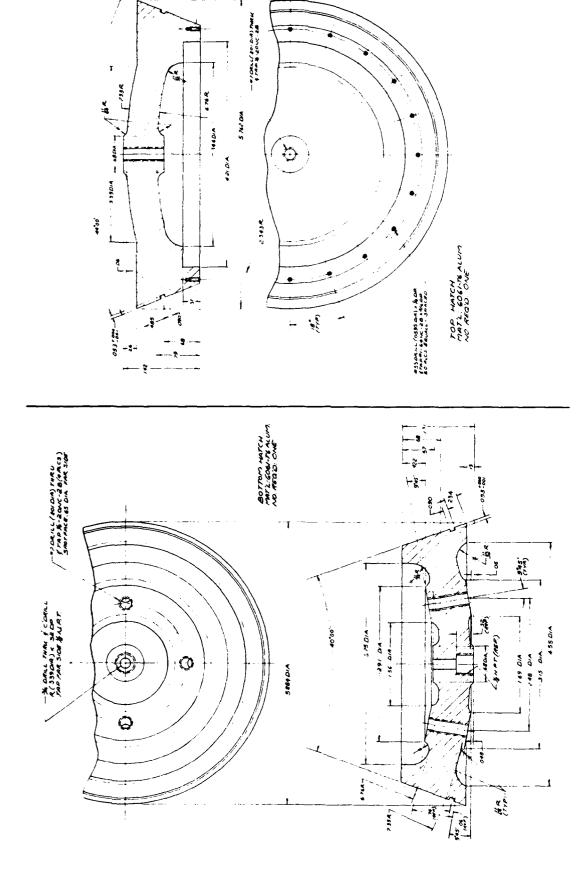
A. Polar Aluminum Hatch Assemblies for the 15-inch OD X 13-inch 1D Model 34.
